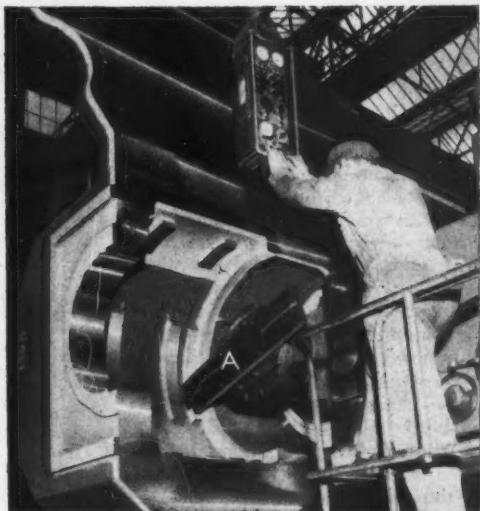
For boring operations, the ram of the C.W.B.-Innocenti machine is fitted with a right-angle attachment, as here shown. This set-up provides for machining arcuate pads to which a thrust bearing is subsequently secured
